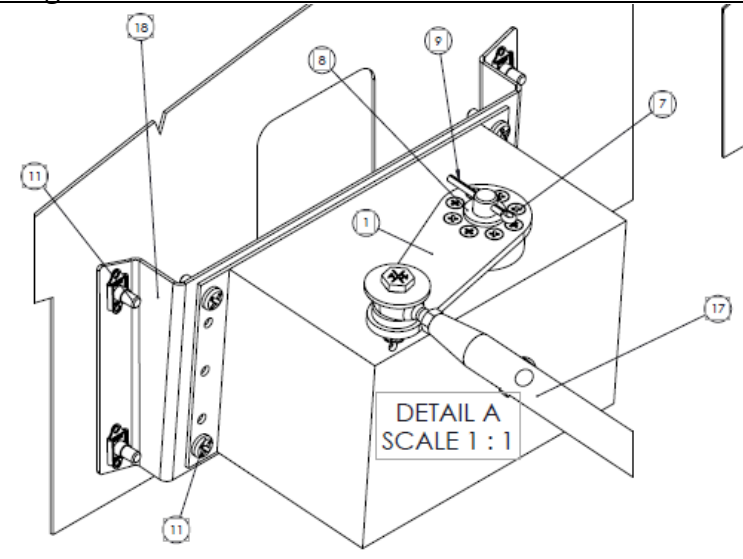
MOUNTING PLATE AND SERVO ASSEMBLY
